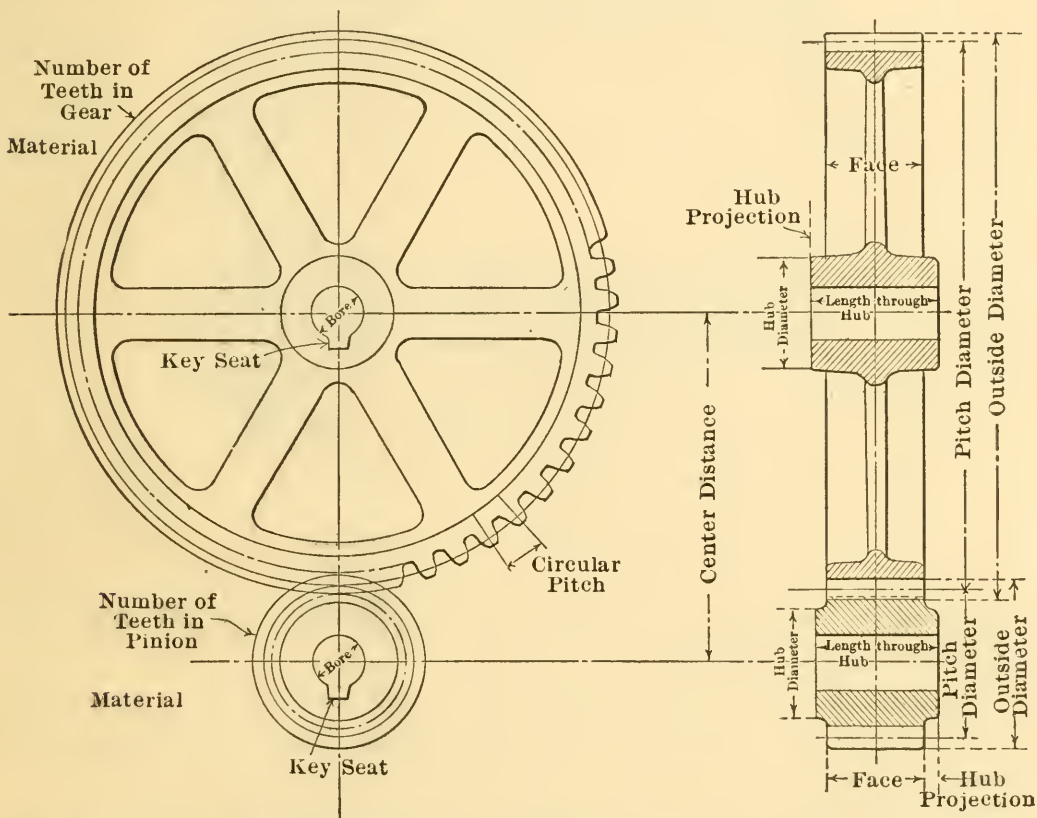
NECESSARY DIMENSIONS TO COMPLETELY DESCRIBE A PAIR OF SPUR GEARS.
